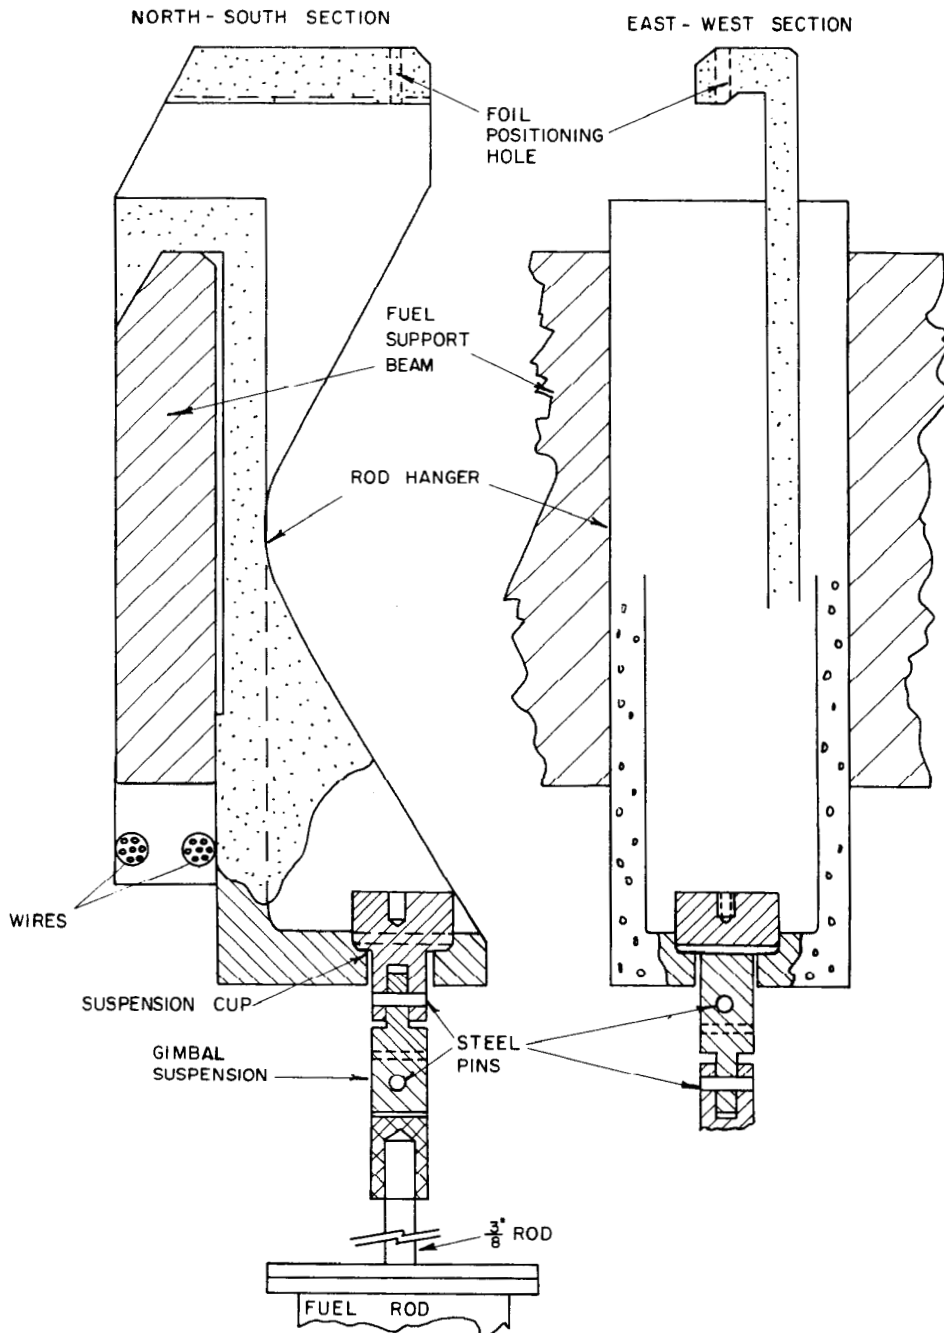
ZED-2 ROD HANGER AND ROD SUSPENSION DETAILS
